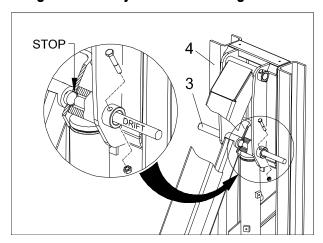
Jib Cylinder Removal - Figure 2 of 2
